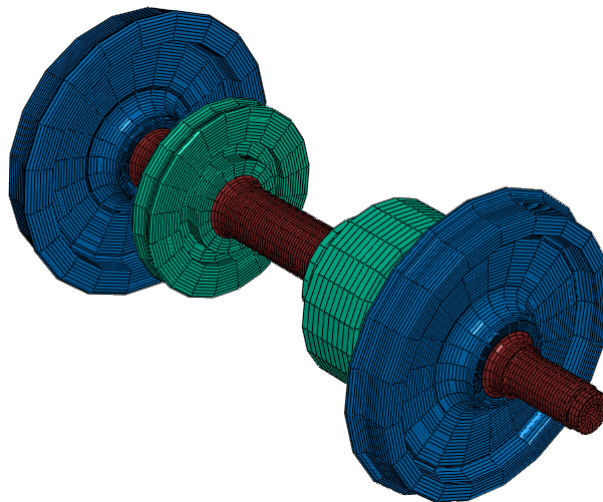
Isometric view of the numerical model of the axle with outside axle boxes.
